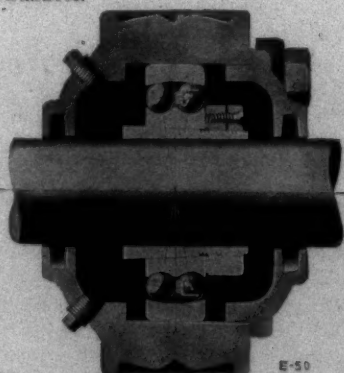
Sectional View of Hanger Box Mounted on Shaft.
